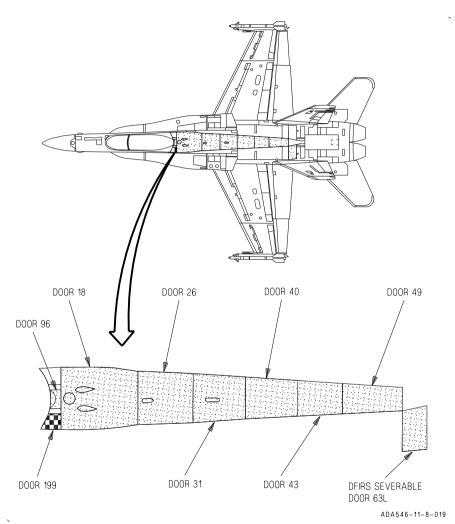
Flammable Liquids, Compressed Gasses and Explosive Devices (Sheet 7)
